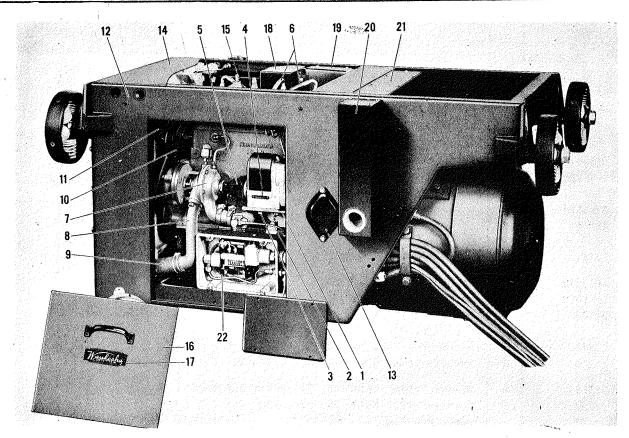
MAGNETO SIDE VIEW OF ENGINE-GENERATOR
